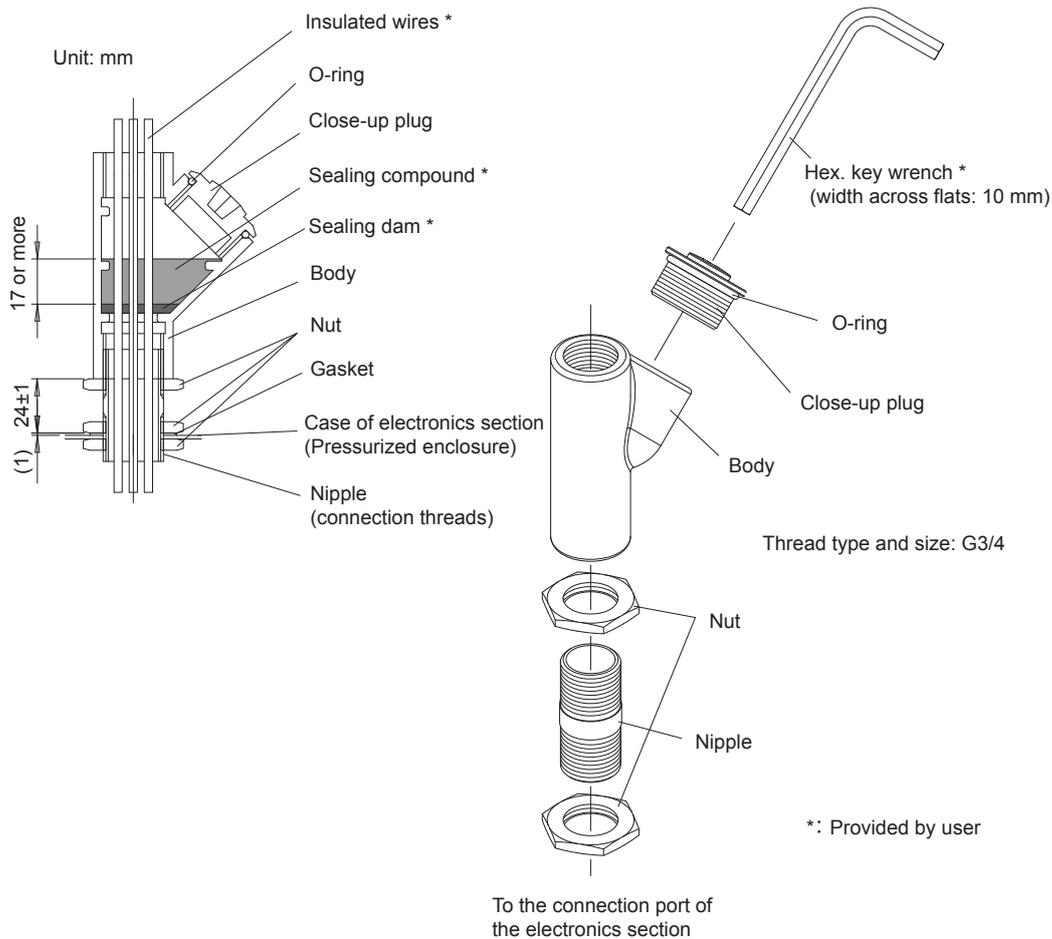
Mounting procedure for sealing fitting (accessory)
